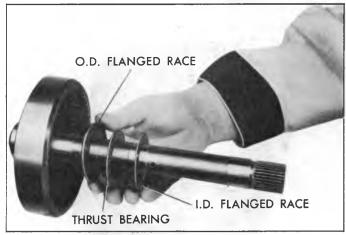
T--Installing Rear Internal Gear to Sun Gear Bearing and Races
